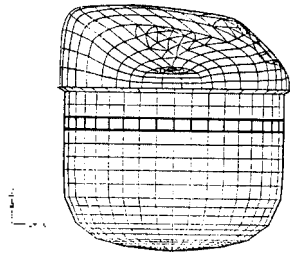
Change of Welding Position of Compressor Shell
